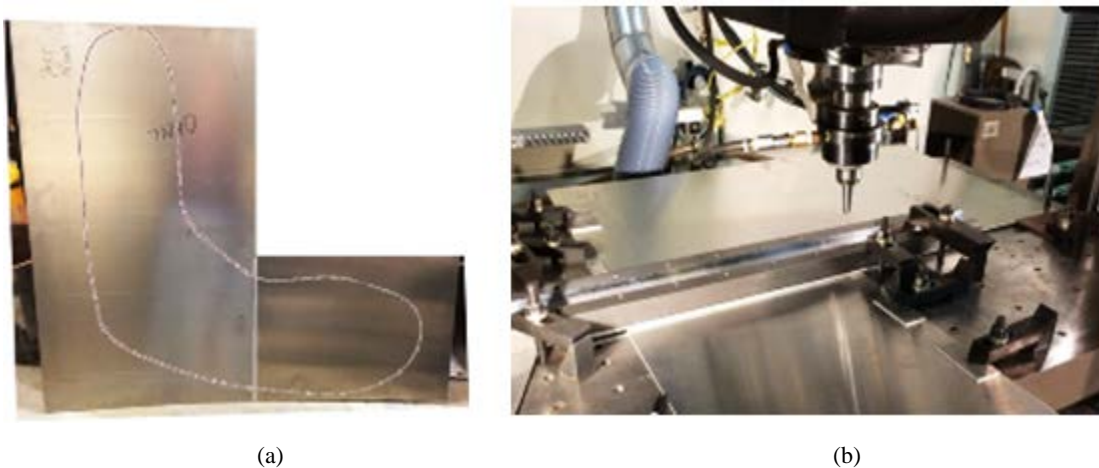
B.6. (a) Tailor welded blank; and (b) FSW setup and blank. Source: ORNL.
